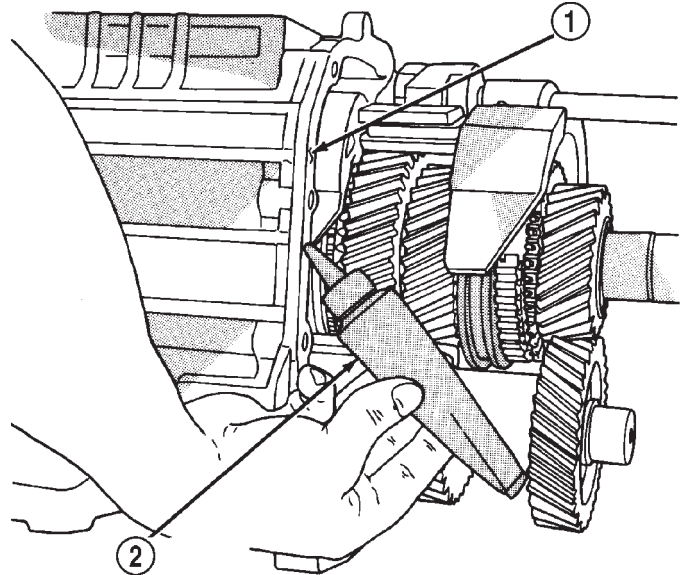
INPUT SHAFT AND COUNTERSHAFT BEARING
